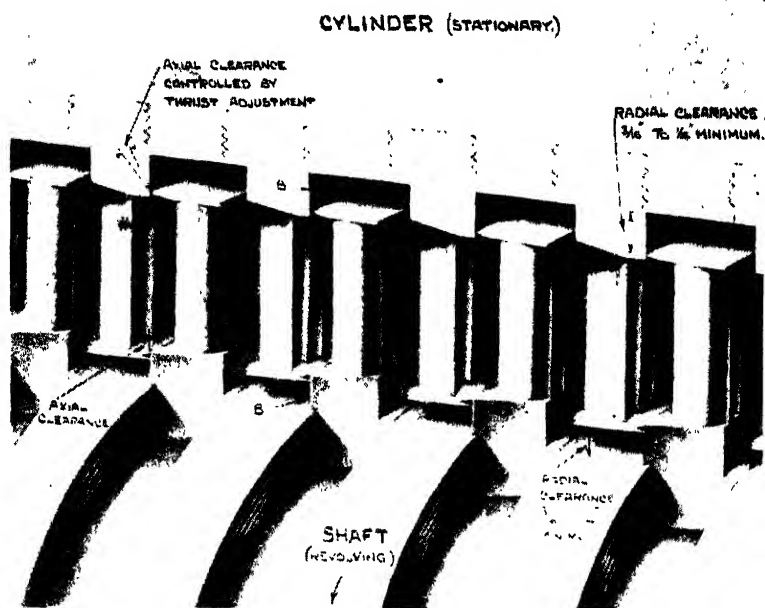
End Tightened Blading. The blade roots, instead of being flush with the surface of the casing and rotor, are raised up to form circumferential barriers BB. (Direction of steam flow \rightarrow) (C. A. Parsons & Co. Ltd.).
